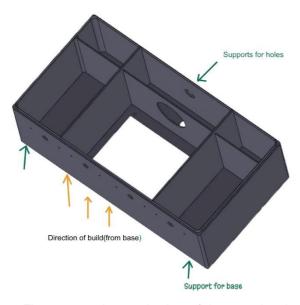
Isometric view of the part showing the print orientation and direction with support structure.
